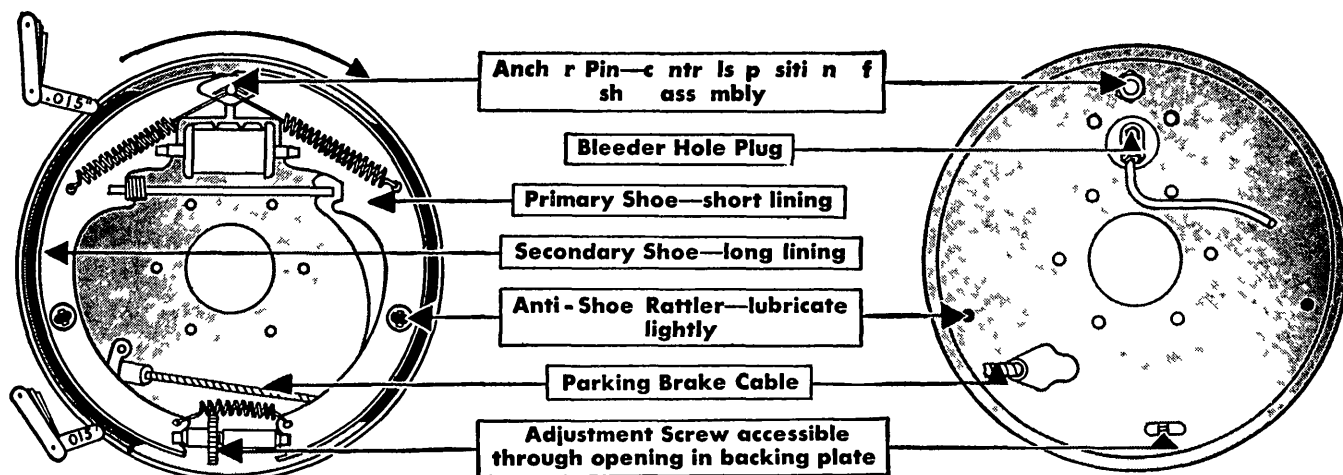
Bendix hydraulic single anchor brake with no eccentric adjustment. Diagram shows right rear brake; front brake identical except for absence of parking brake
